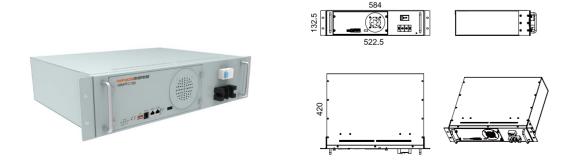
Appearance & Mechanical Drawing of 48NPFC100(23")
